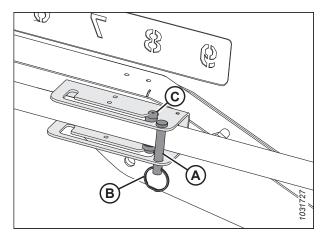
Fore-Aft Cylinder Adjustment Type 2 – Aft Position
